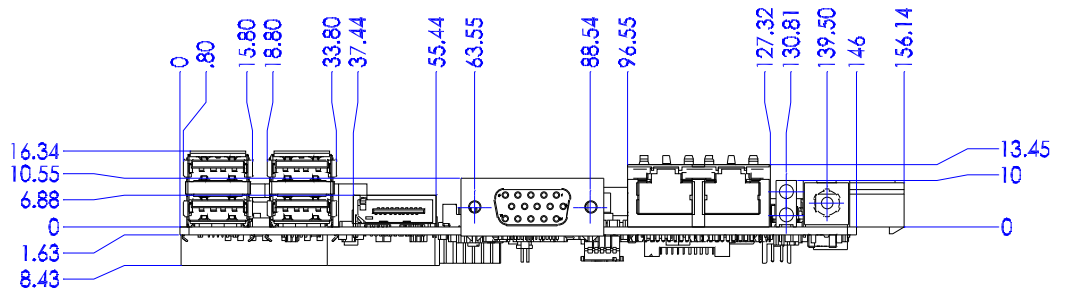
MIO-5271 Mechanical Drawing (Coastline)
